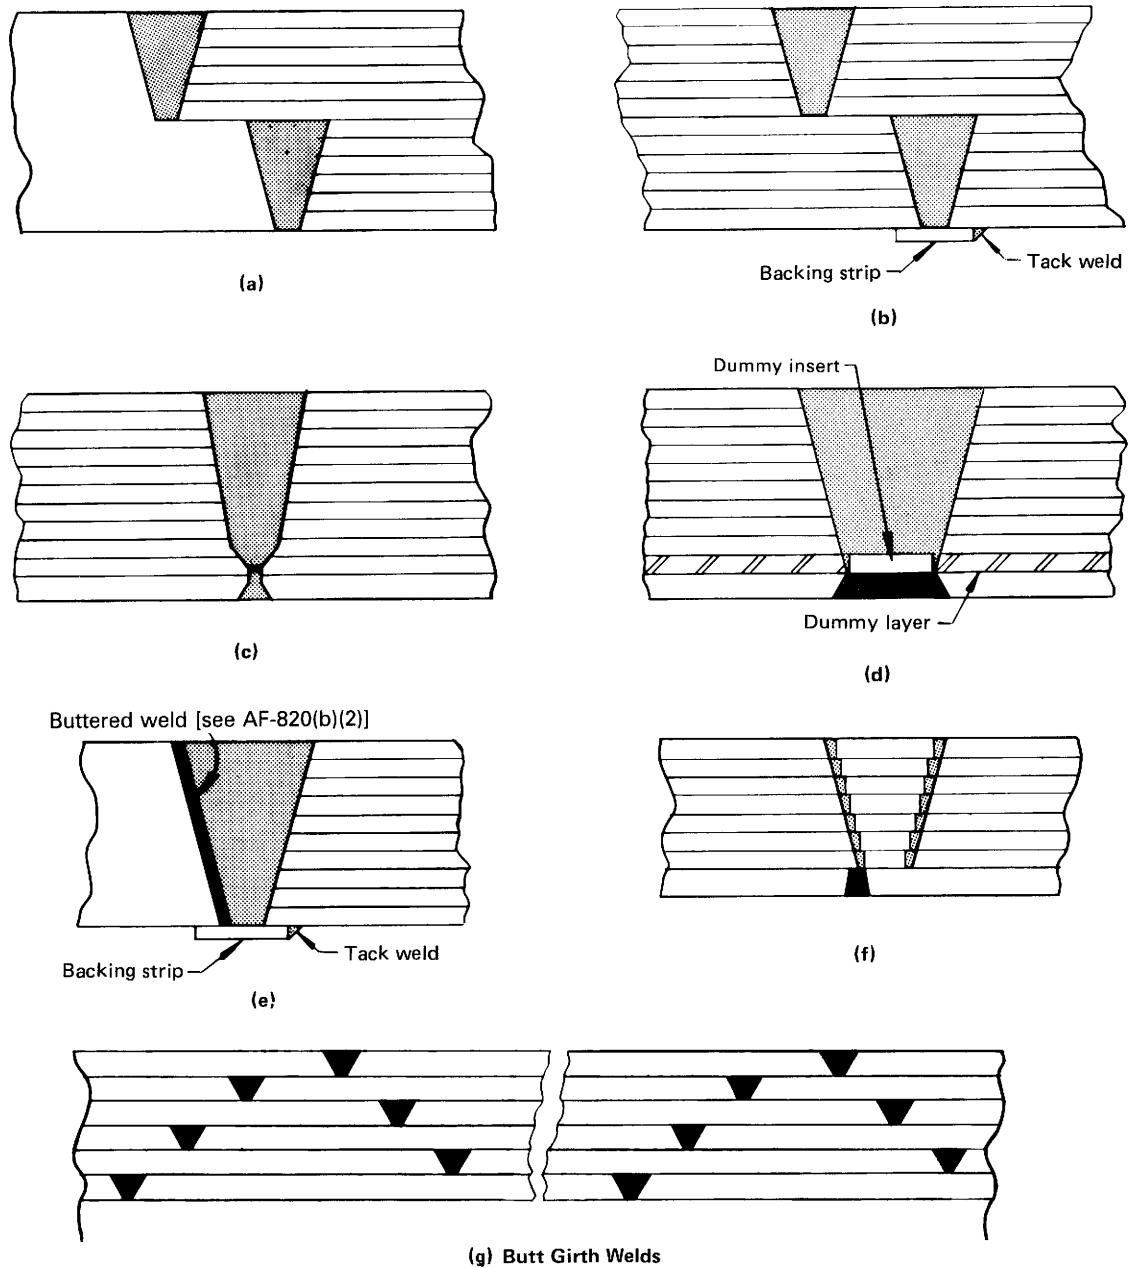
SOME ACCEPTABLE WELDED JOINTS OF LAYERED-TO-LAYERED AND LAYERED-TO-SOLID SECTIONS
